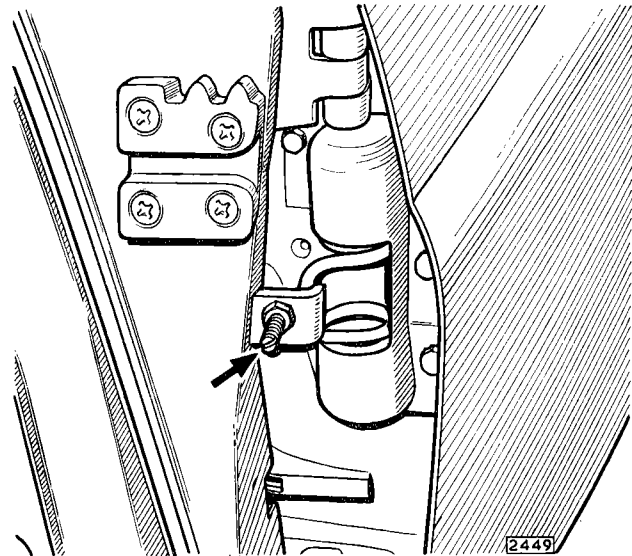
Showing the location of the rear door torsion spring adjuster screw
